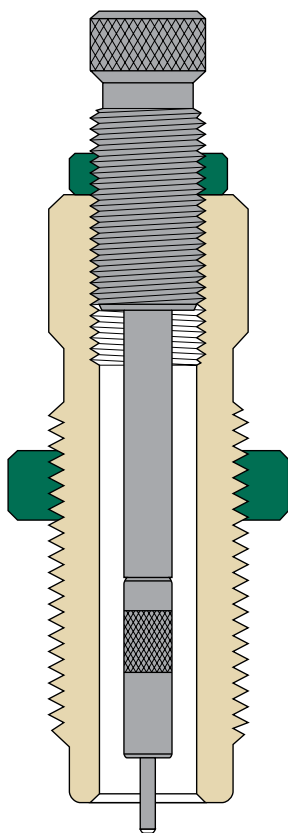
A steel straight-wall case sizing die cutaway showing the decapping assembly and lock rings.
